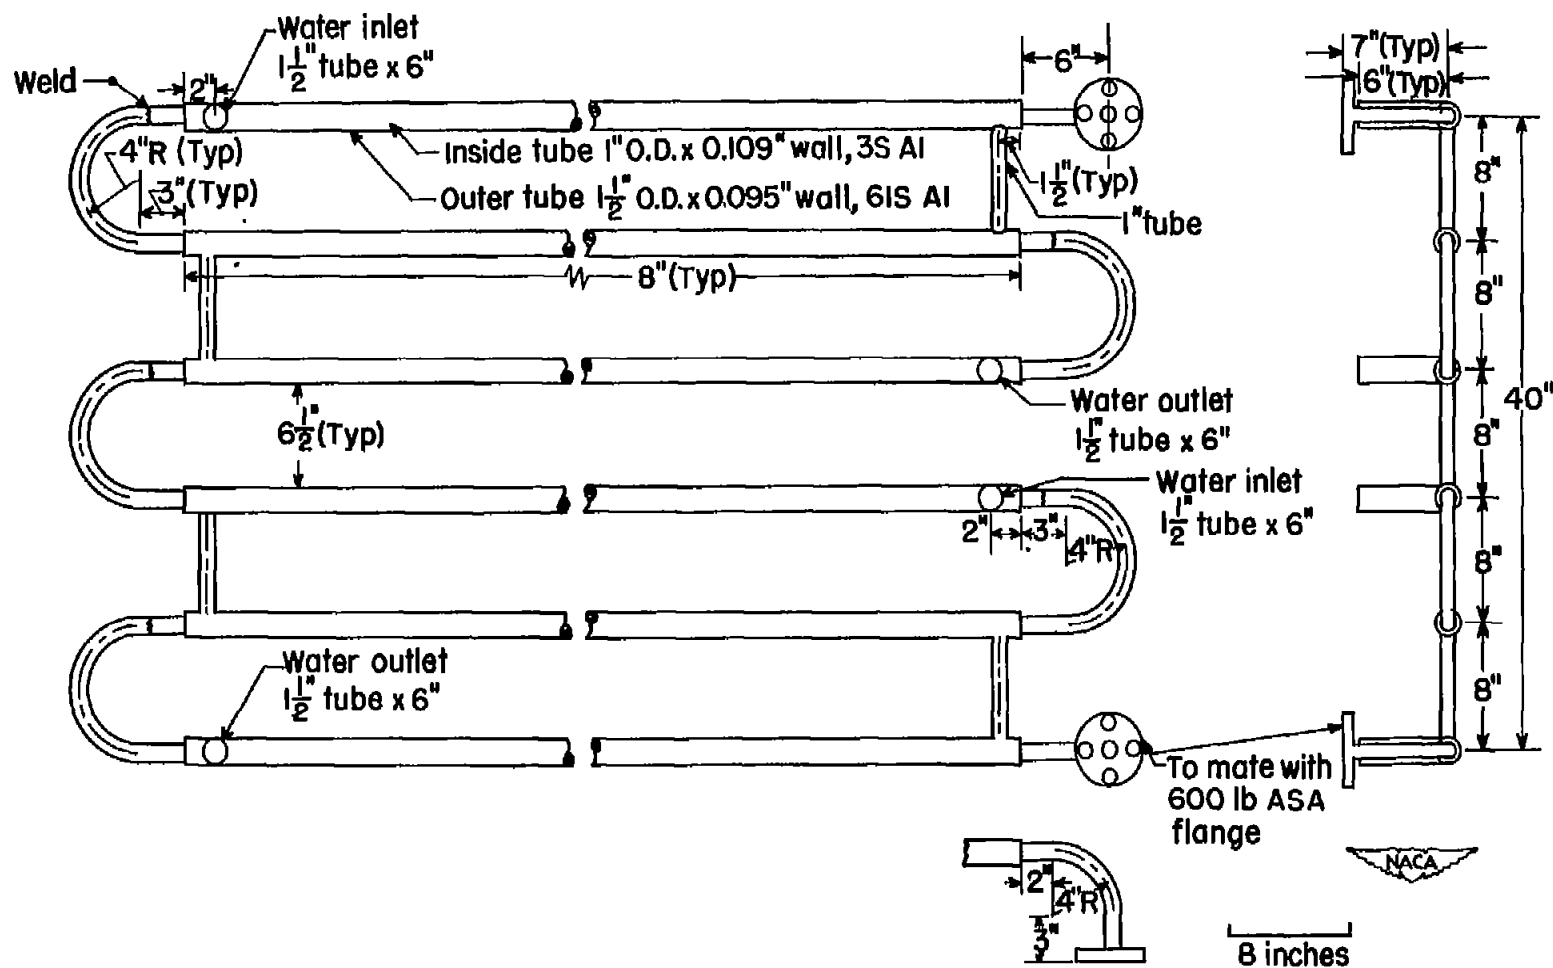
Heat exchanger. All welding to be Heliarc; 1-inch tube circuit tested to 600 pounds per square inch and 1½-inch tube circuit tested to 150 pounds per square inch.
